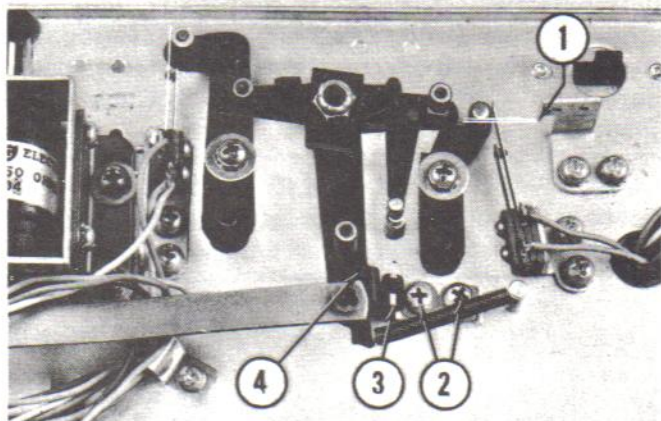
STOP BRACKET ADJUSTMENT, LATCH SOLENOID
